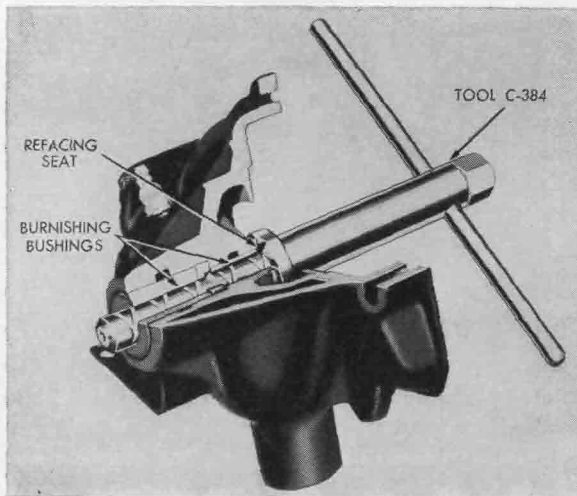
Burnishing bushings and refacing seal seat with special tool. Housing has been cut away to show tool. (*Plymouth Division of Chrysler Corporation*)
